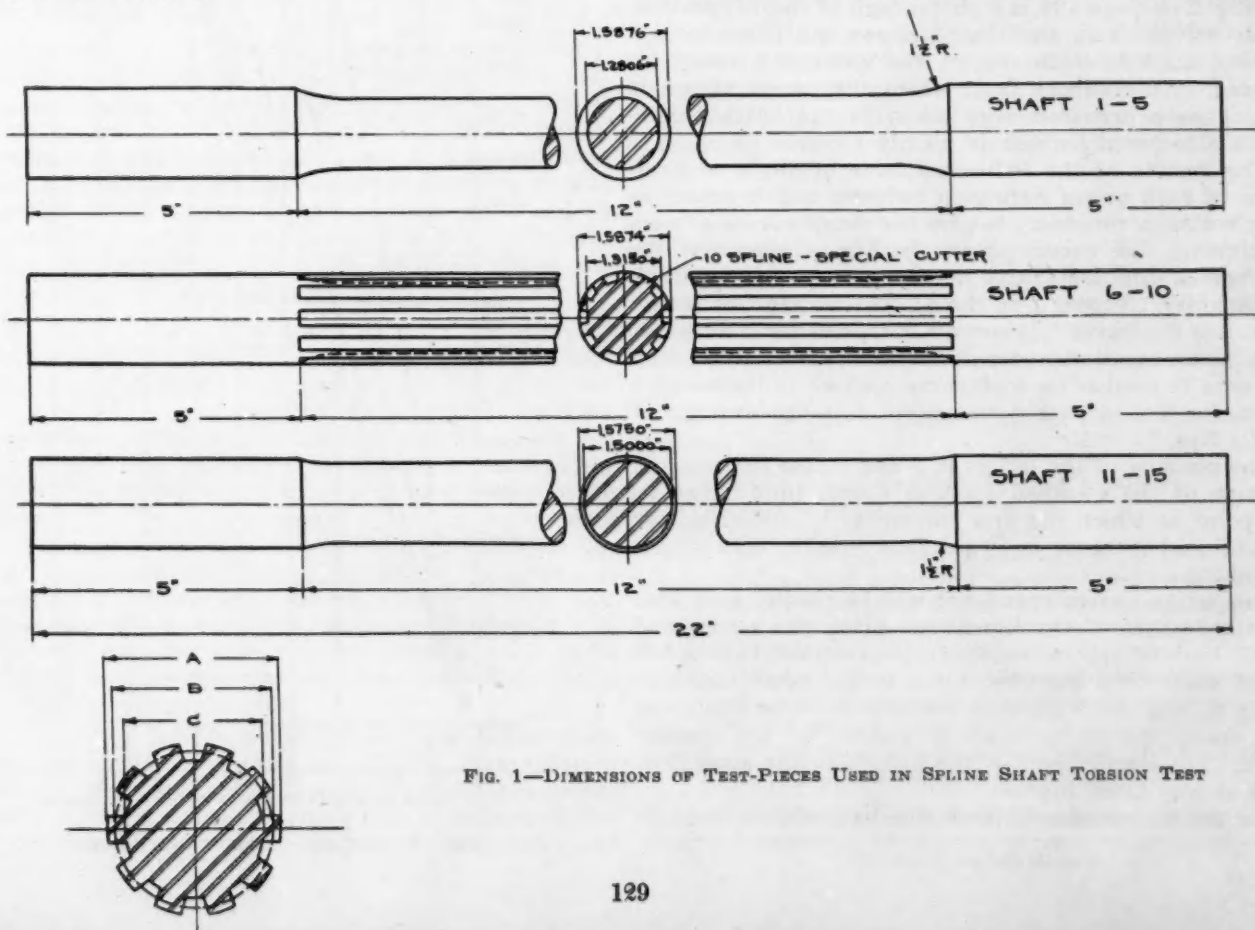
DIMENSIONS OF TEST-PIECES USED IN SPLINE SHAFT TORSION TEST
